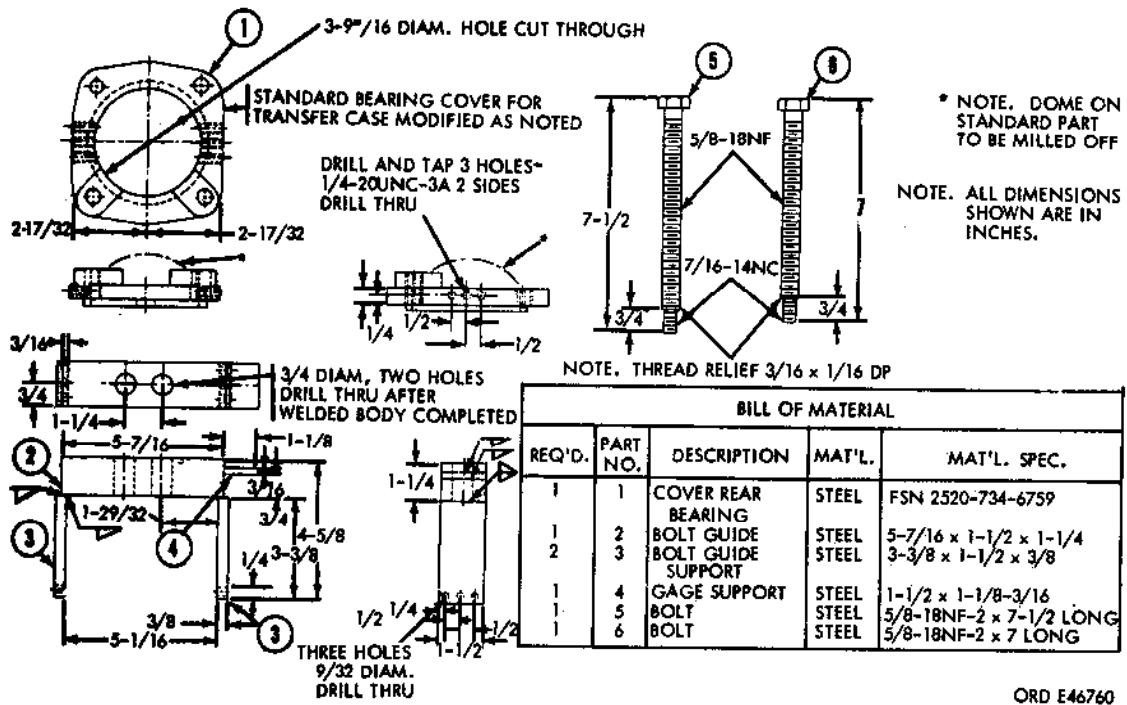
Fabricating adjusting fixture for intermediate shaft bearings
